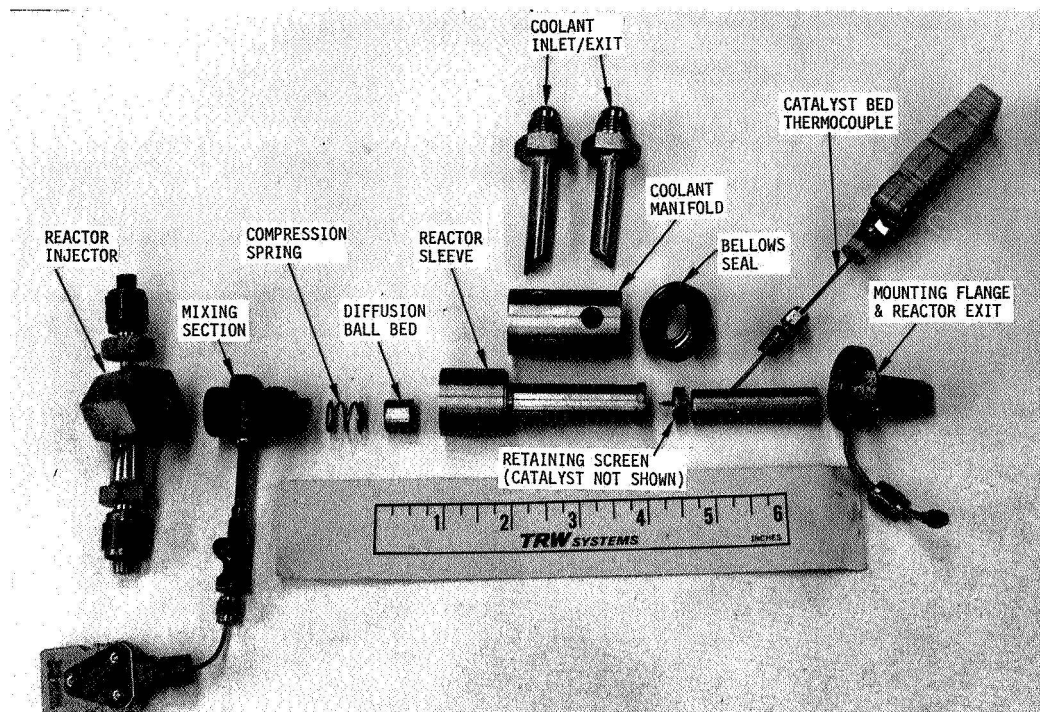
Disassembled Cooled Reactor - Bellows Seal
